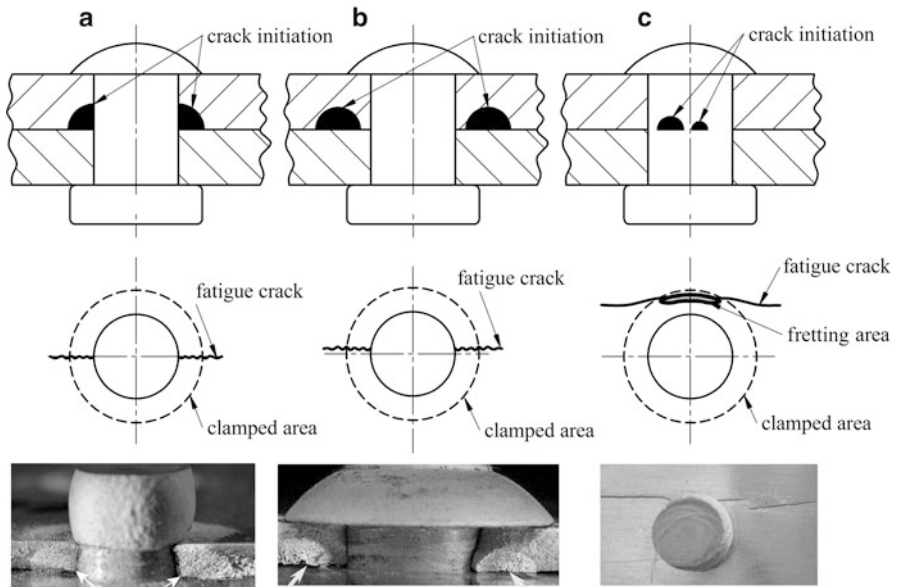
Common fatigue crack initiation sites in lap joints: (a) at the hole edge; (b) outside the hole; (c) above the hole
